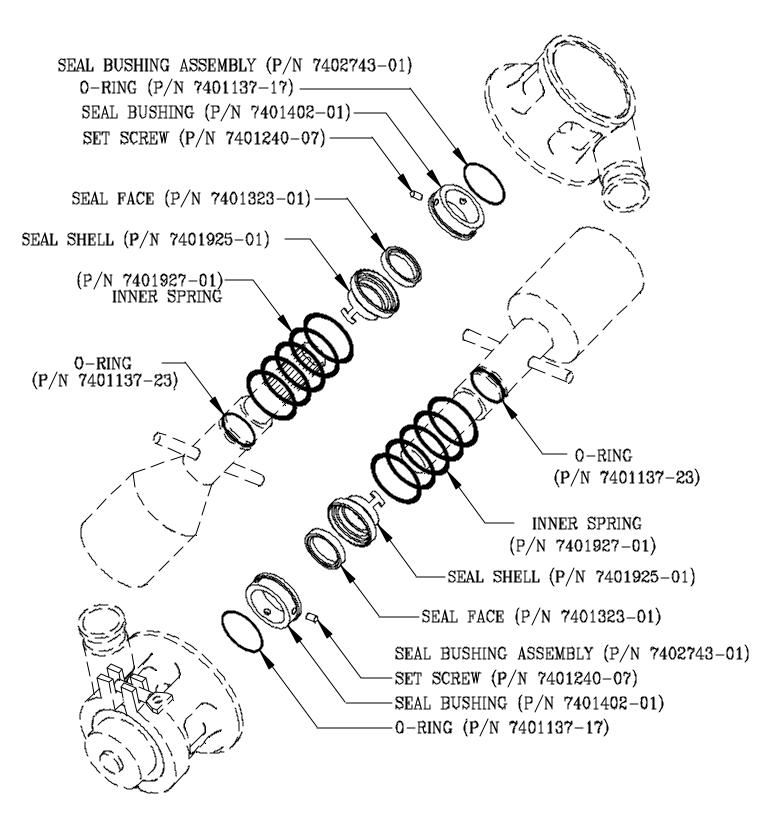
Balanced Seal Assemblies, Tangential Product Heads Backside of Figure 7-6 -- 11 x 17 foldout drawing
